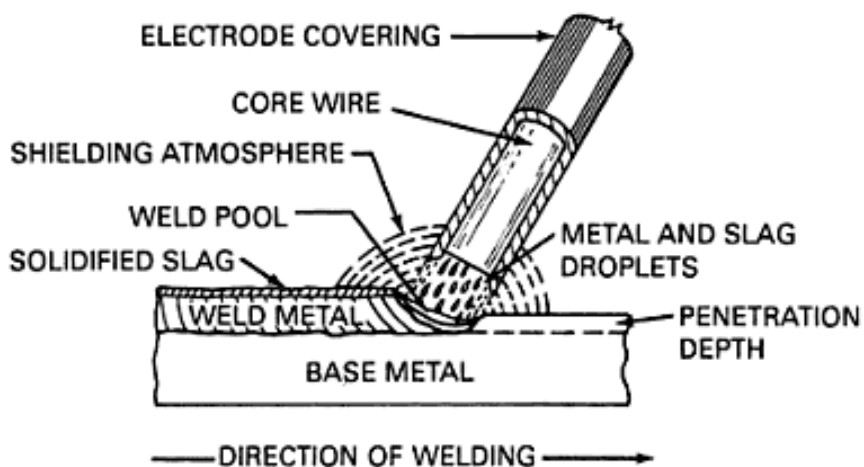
Shielded Metal Arc Welding (Harris, 2002)
